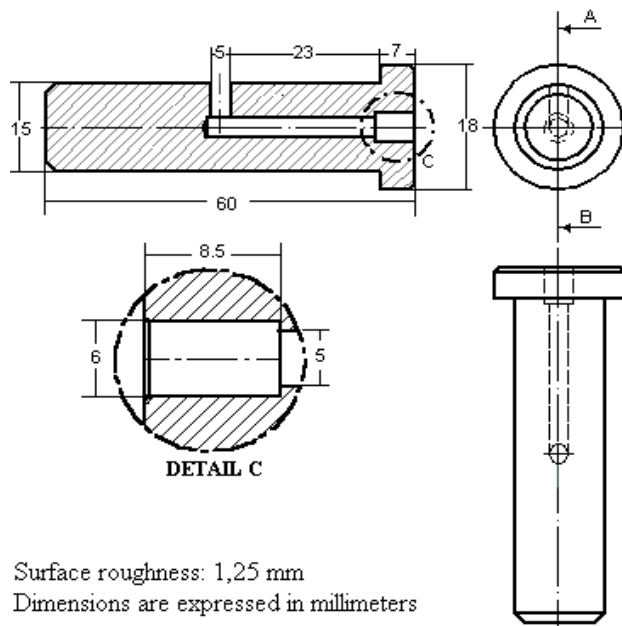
Mechanical drawing of the rotor bearing with lubrication hole.
